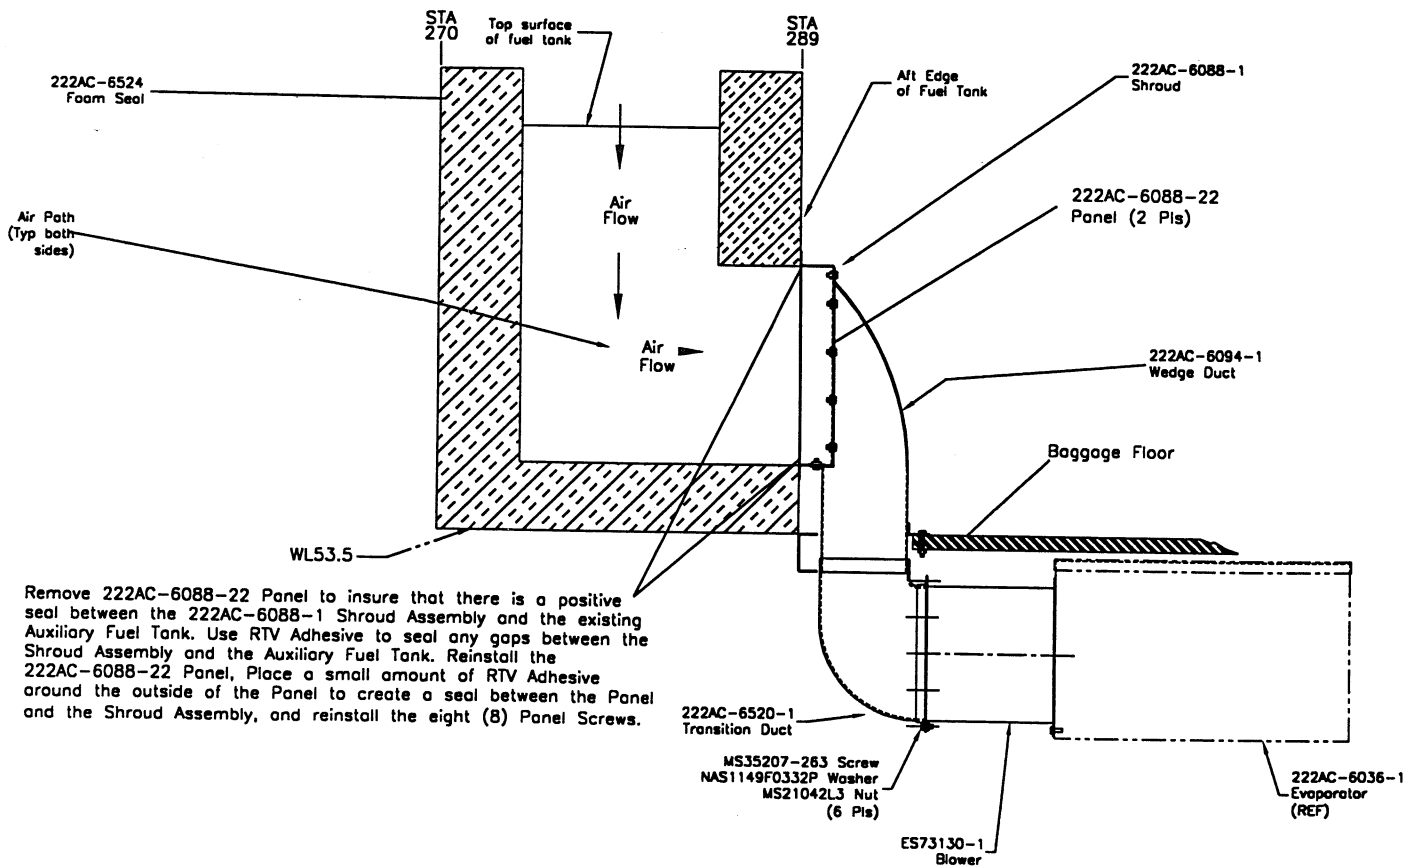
Side View of 222AC-6088-1 Shroud Installation
